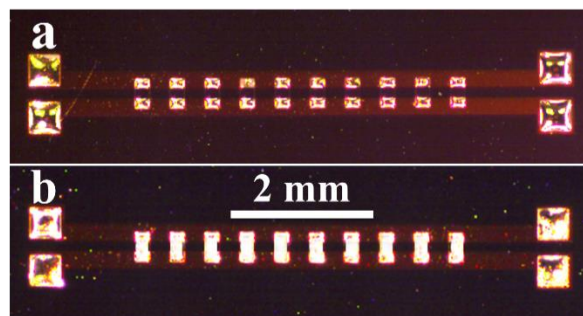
A 10-component parallel test circuit before (a) and after (b) the assembly of 01005 100 k Ω resistors.
